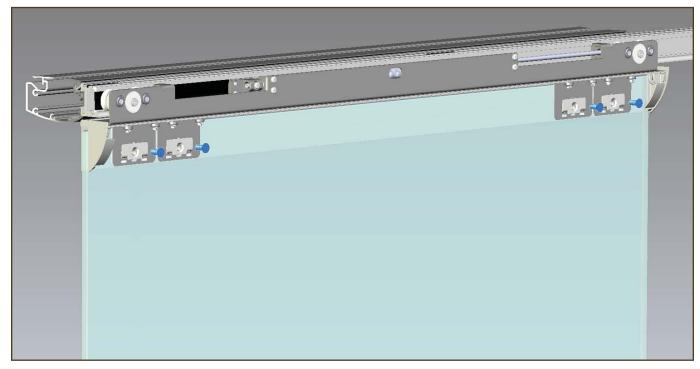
Fasten all four (4) Flat Head Machine Screws (highlighted in blue) to lock Height Adjustment Plates into place.
